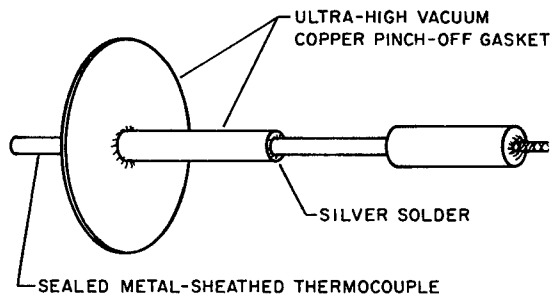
Vacuum feed-through technique for introducing a sealed, metal-sheathed thermocouple into an ultra-high vacuum chamber at JPL.
